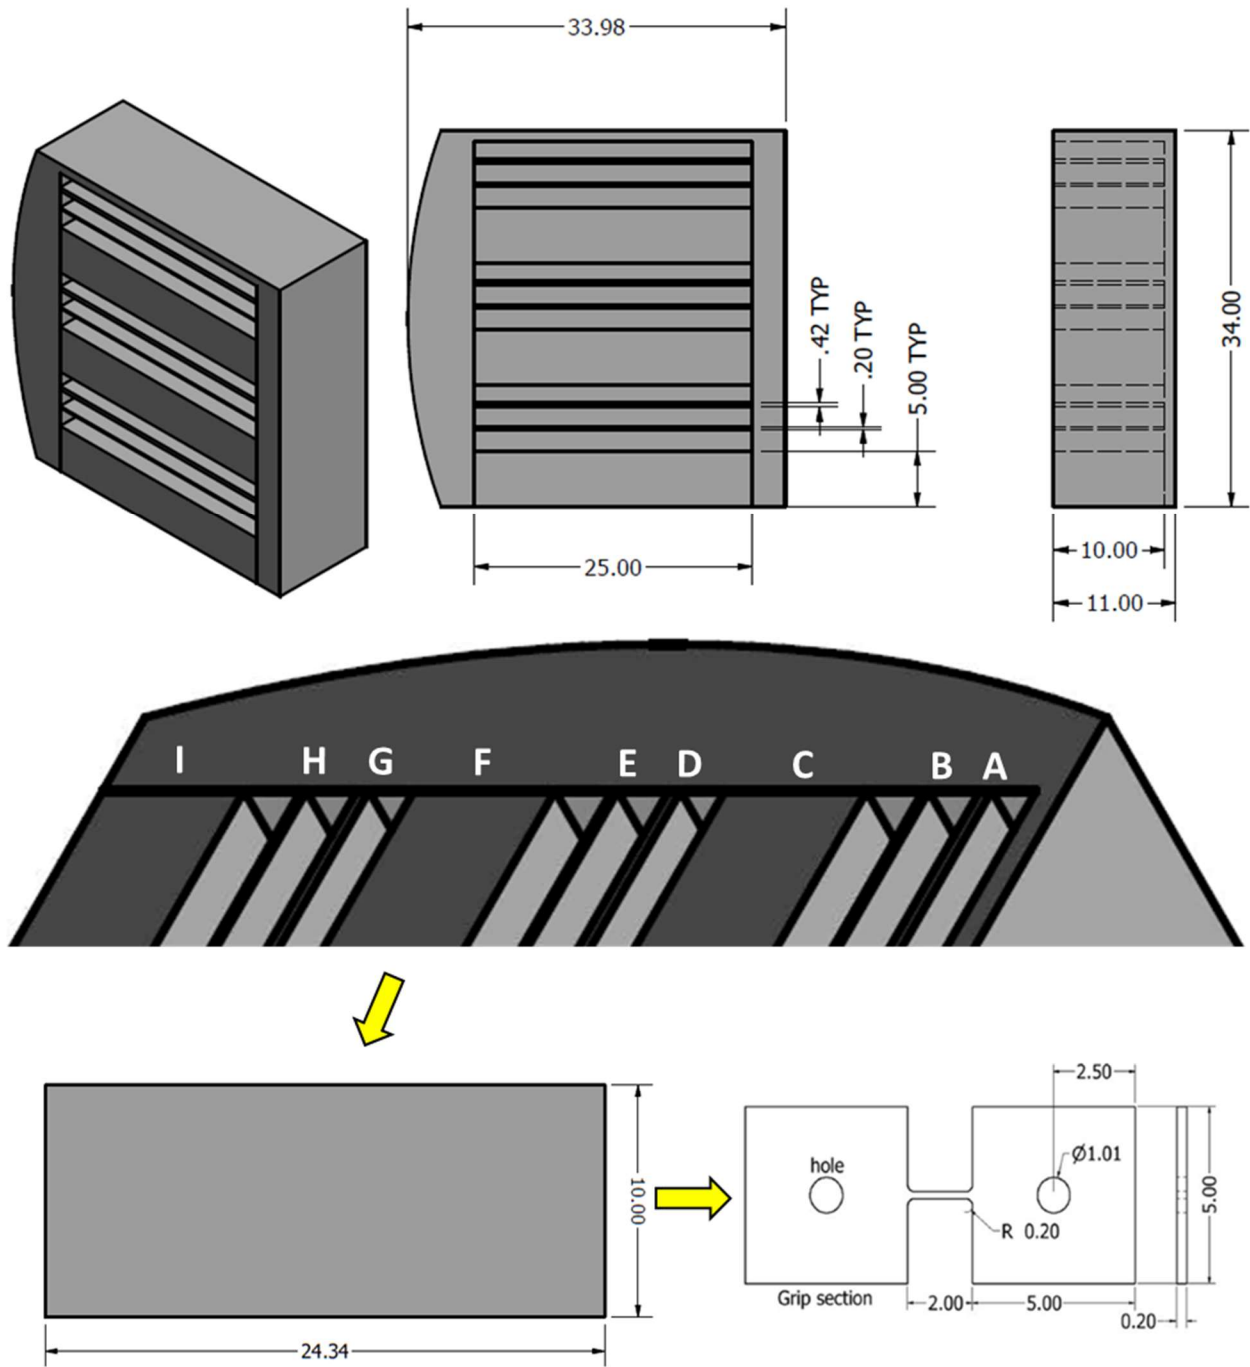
Schematic showing dimensions of block TH1, wafer removal from section F, and meso-tensile specimen removal from wafer. All dimensions in mm.
